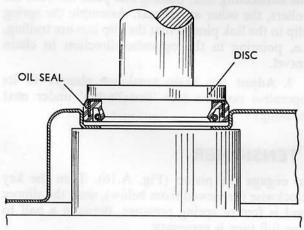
Sectioned view showing timing cover oil seal installation. The cover oil seal recess must be supported and pressure applied through a disc contacting the seal periphery
